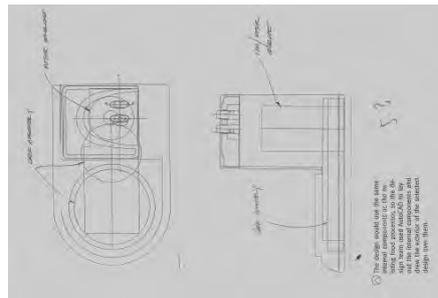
Example of Diagrammatic Component Drawing (Dv.D10)
